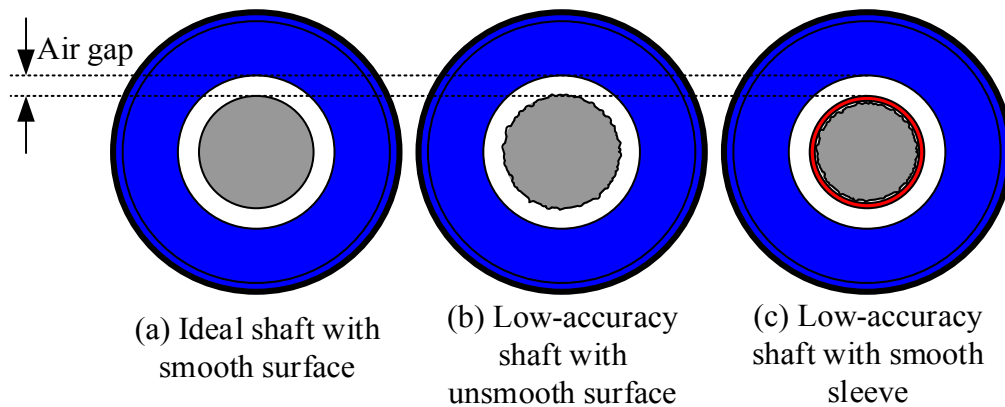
Air bearing (blue) and shaft (gray) with high-accuracy thin sleeves (red)
